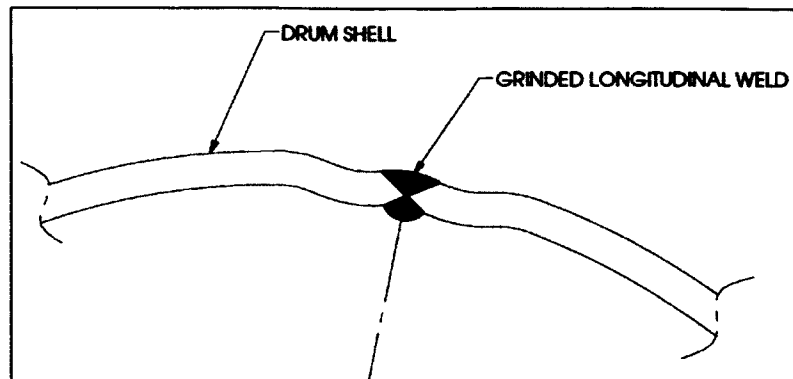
Run-out Defect, Longitudinal Weld.
